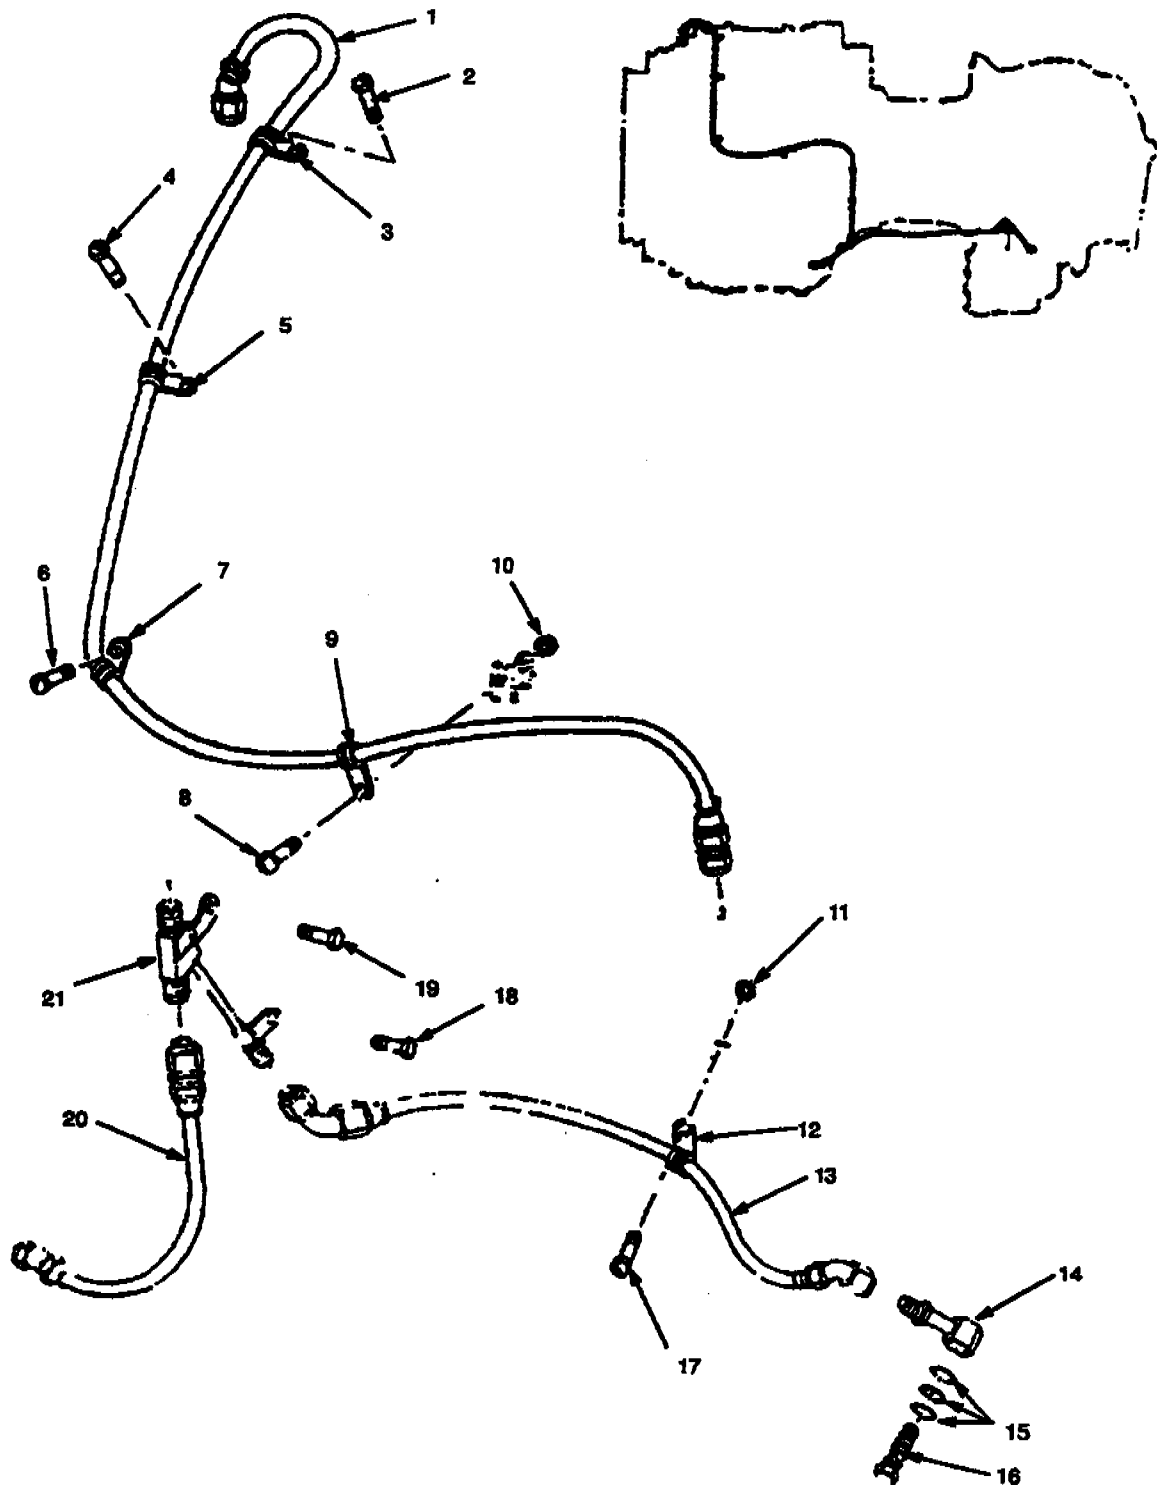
Lubrication Pressure Manifold, Hose Assemblies and Attaching Parts (T53-L-13B, -703).
